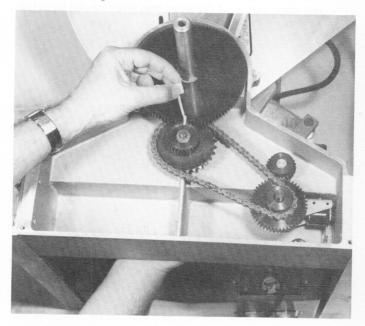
Match Marking Magazine Gear and Magazine Drive Gear
